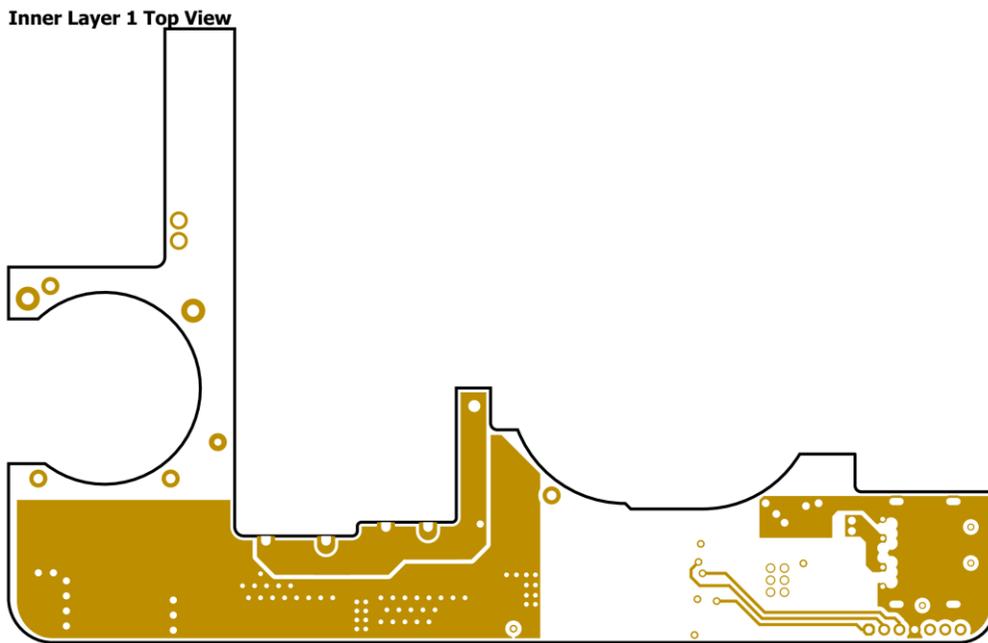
Motherboard Printed Circuit Layout, Inner 1.
